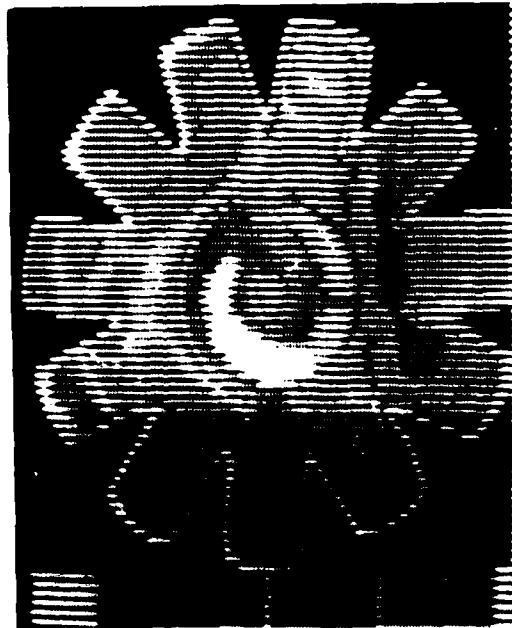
Heat pattern generated during Ultrasonic Vibrothermographic inspection of air compressor seal shown in Fig. 6.
